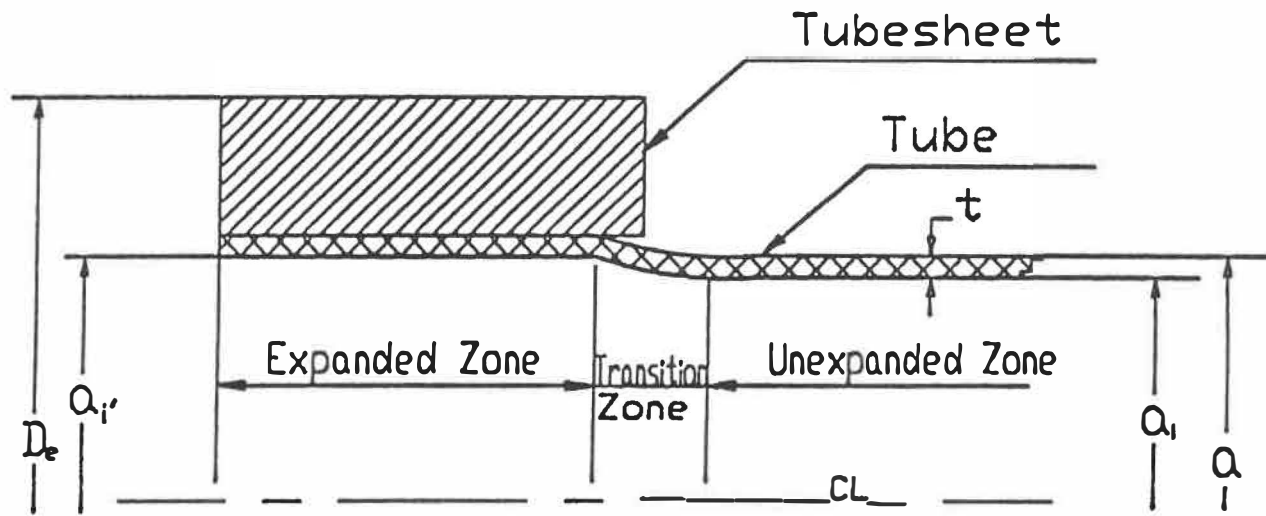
Geometry of model of single tube-to-tubesheet joint
